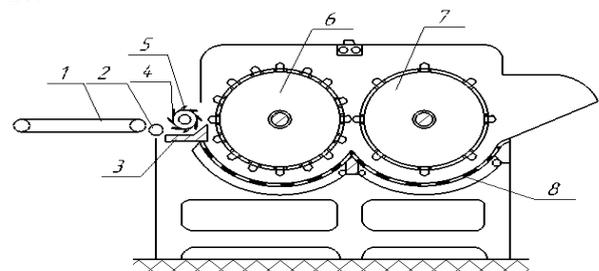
Wool opening machine company "Charpentier" The wool from the supply grill 1 (Fig. 6) enters through the smooth support roller 2 to the ring roller 4 with a spring load 5, which presses the wool layer against the table 3 with the back of the pegs. The bent pegs firmly hold the tufts of wool during the impact of the first pegs drum 6. The first drum has 16 bars with pegs, and the second drum 7 has eight bars. Under the drums are grate 8 from perforated steel with holes with a diameter of 10 mm.
